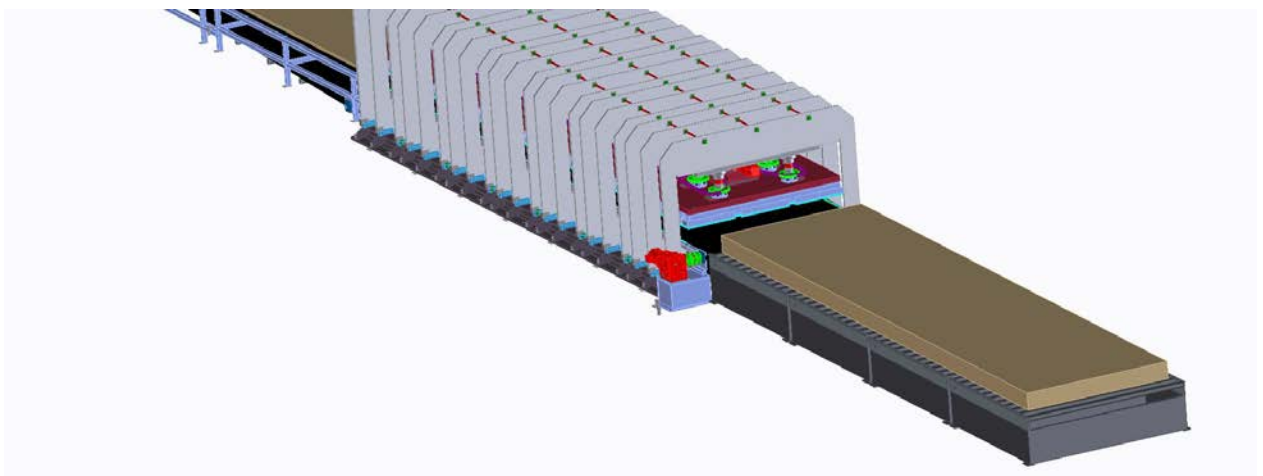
CLT Press feed out and consignment to a rolling conveyor.
